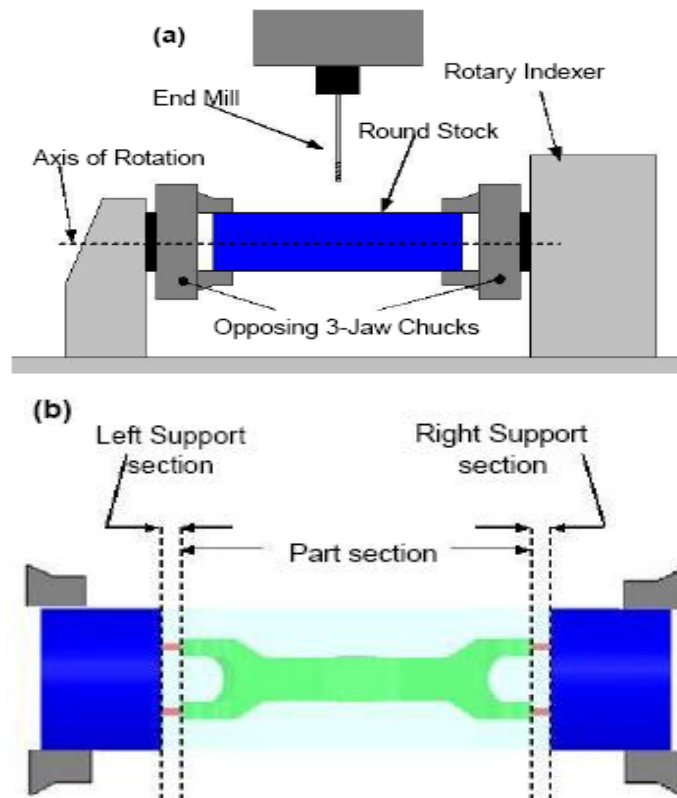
Rapid Machining; (a) Set up, (b) Sections Machining Approach
